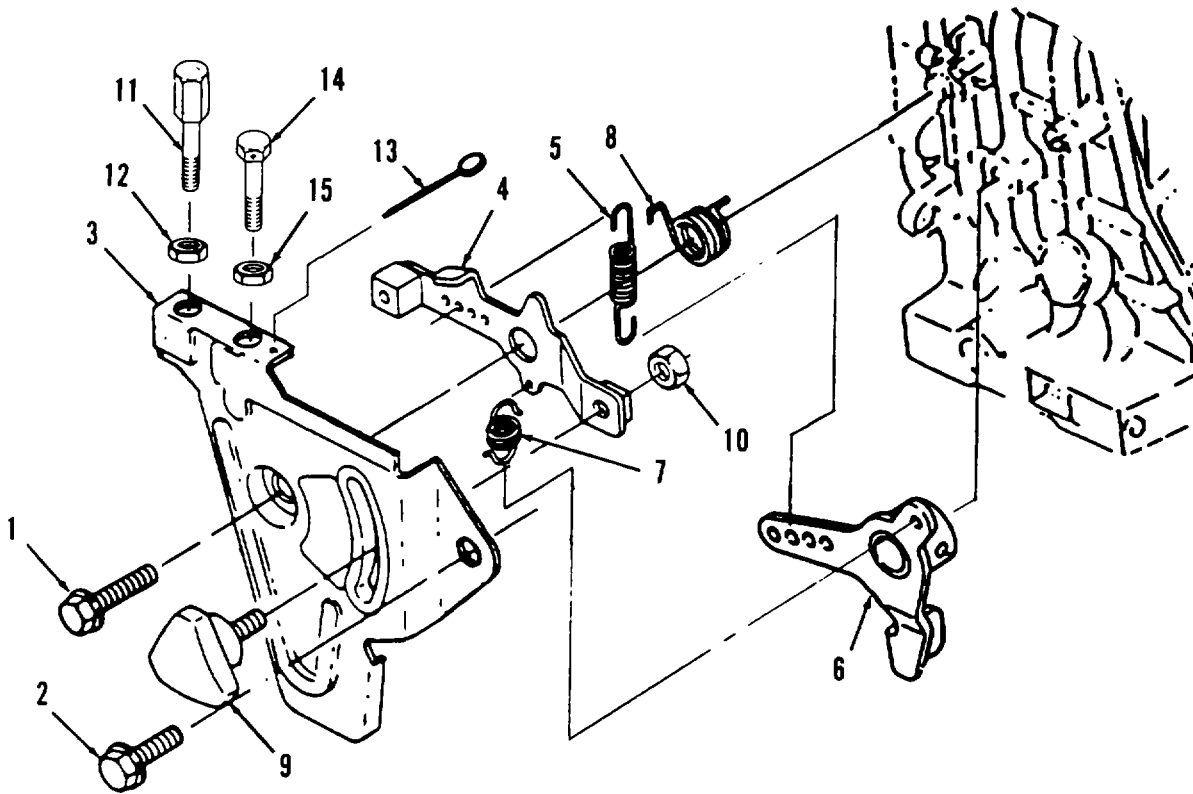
Regulator Bracket Assembly Repair and Replacement.
